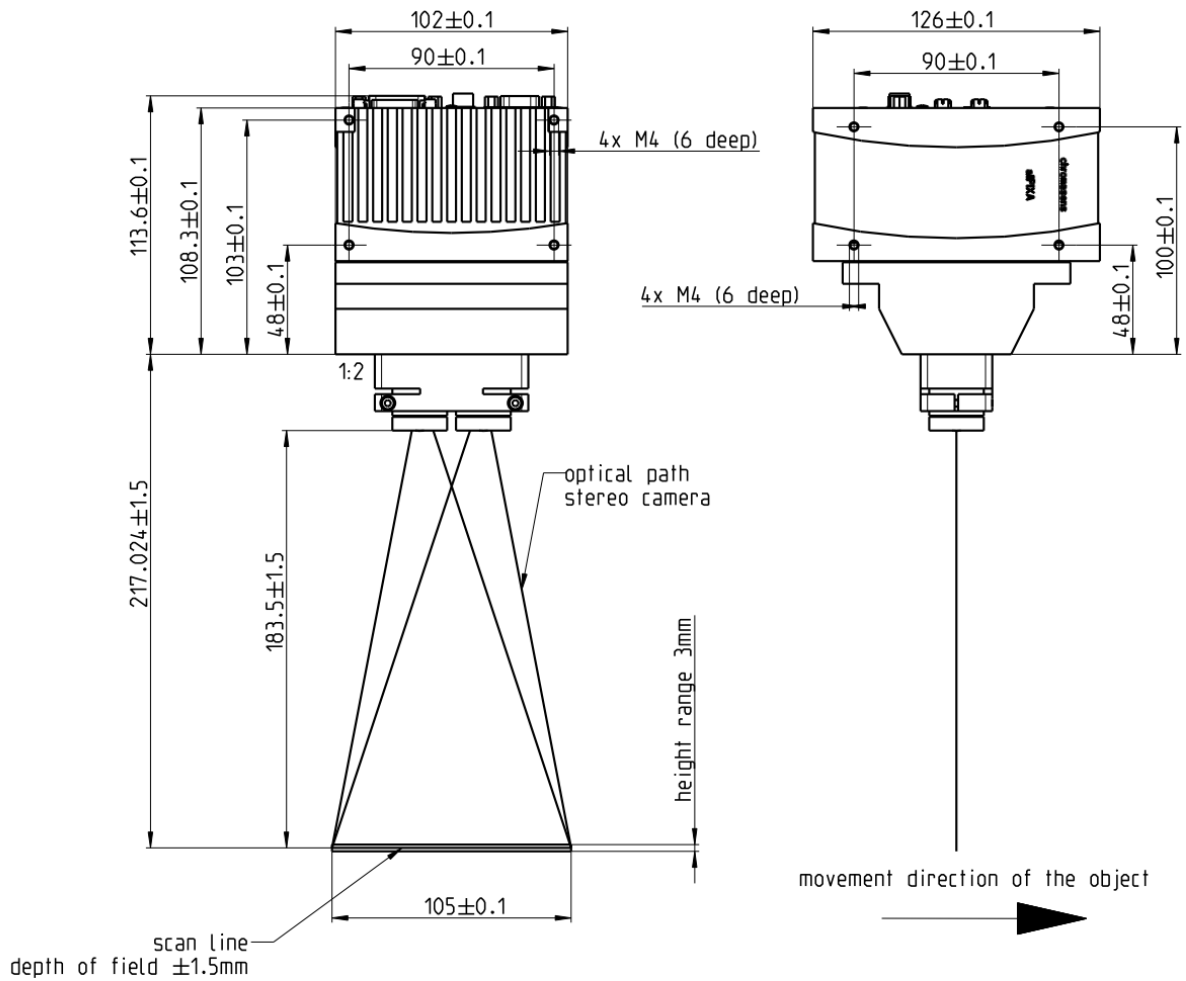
Mechanical Dimensions of 3D-PIXA-C30-A
